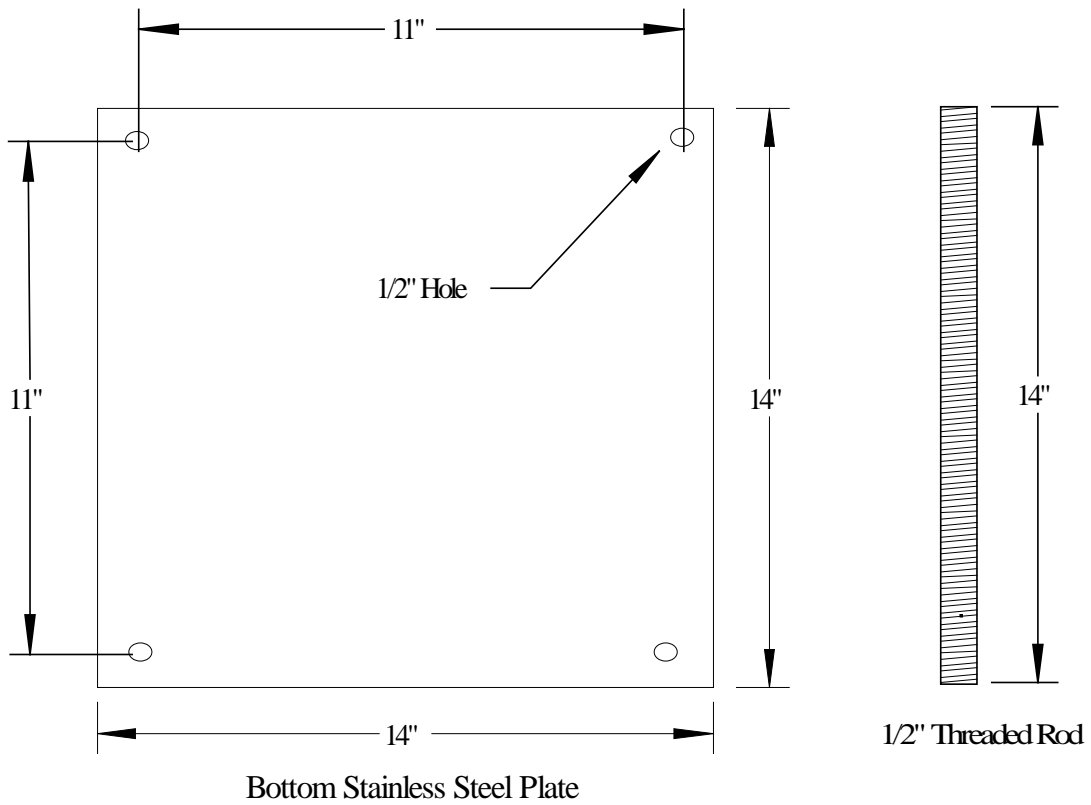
Horizontal Test Apparatus Assembly – Parts of Test Frame
